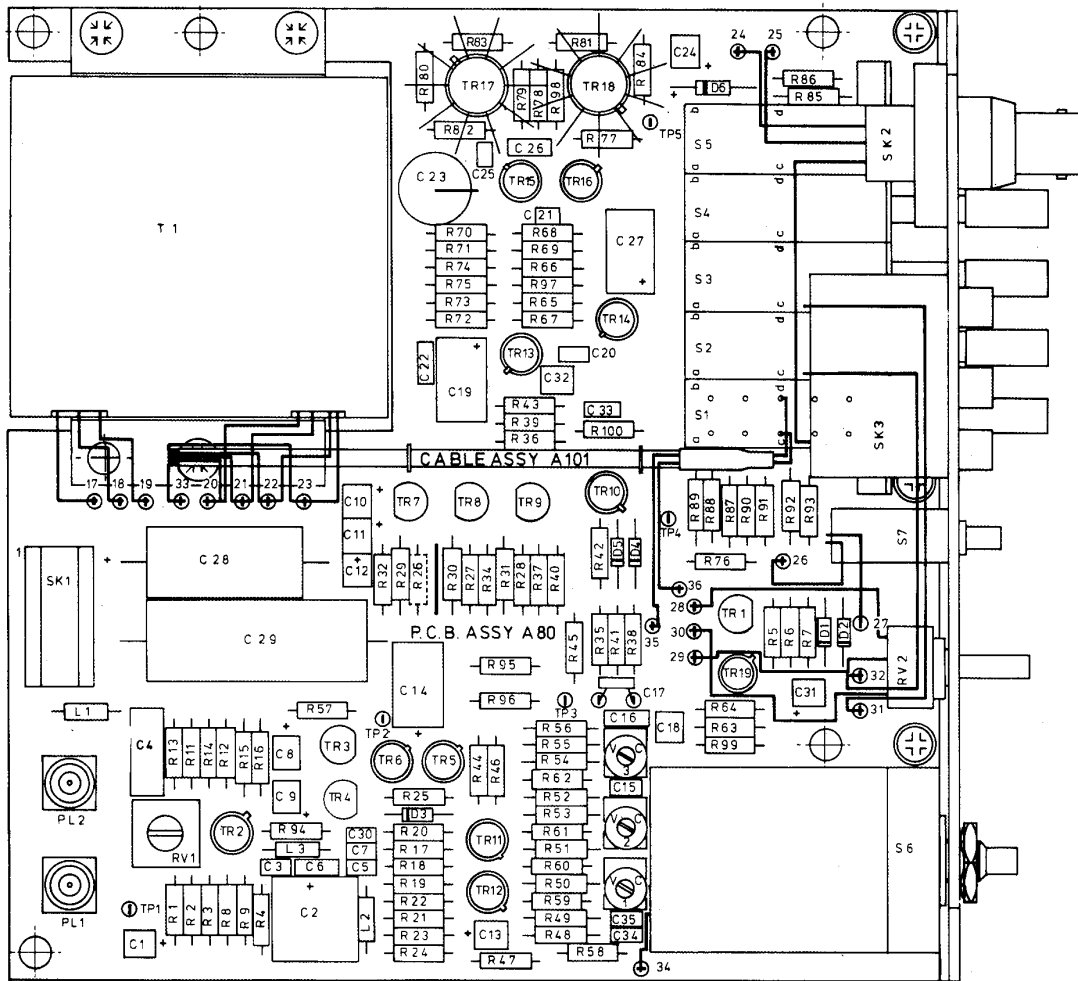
Component Layout, 8.02MHz V.C.O., (41)
